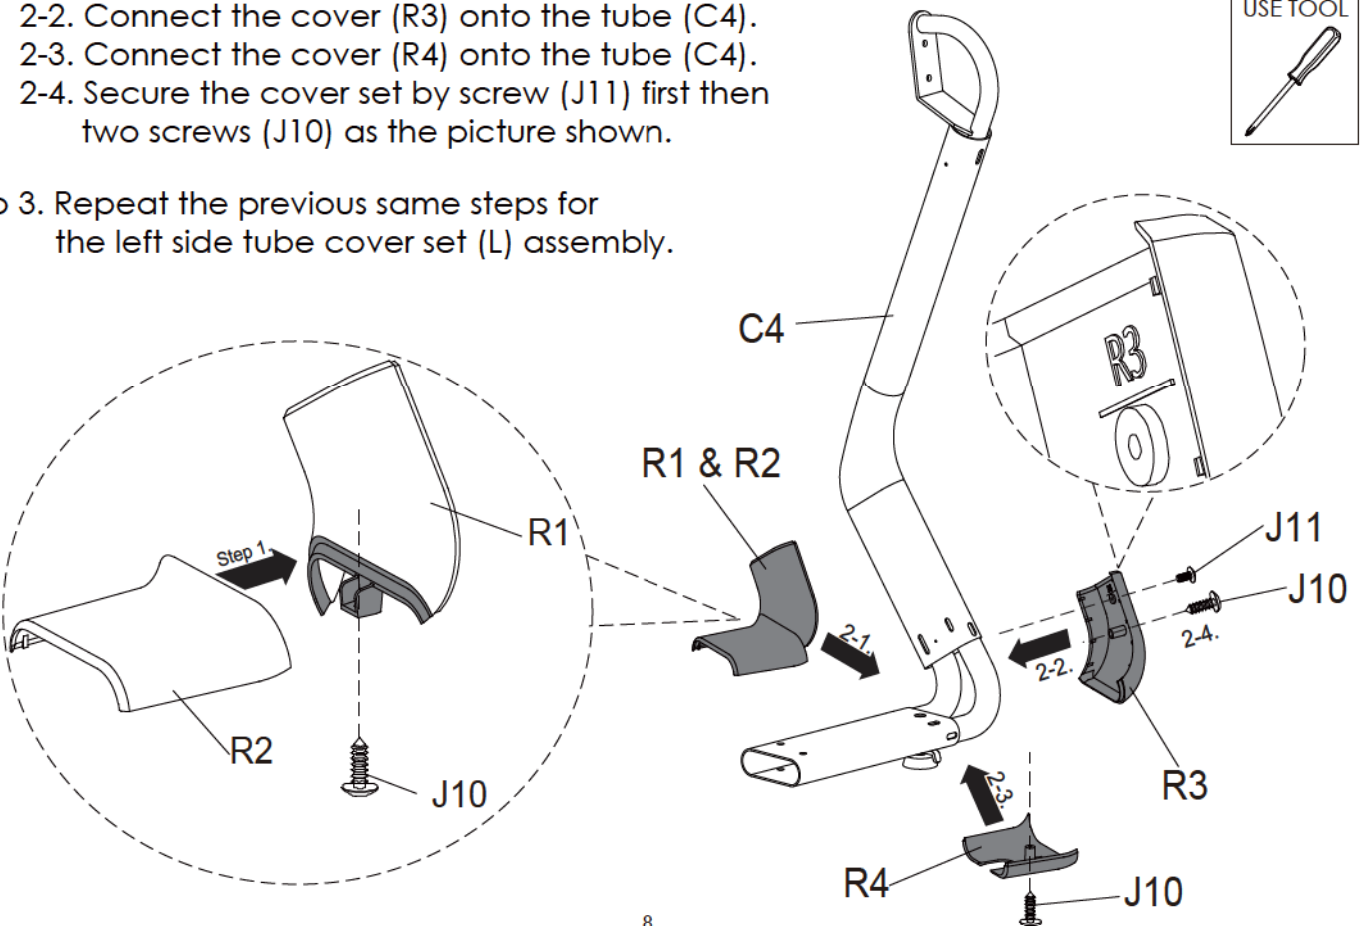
RIGHT SIDE CONNECTING TUBE ASSEMBLY
